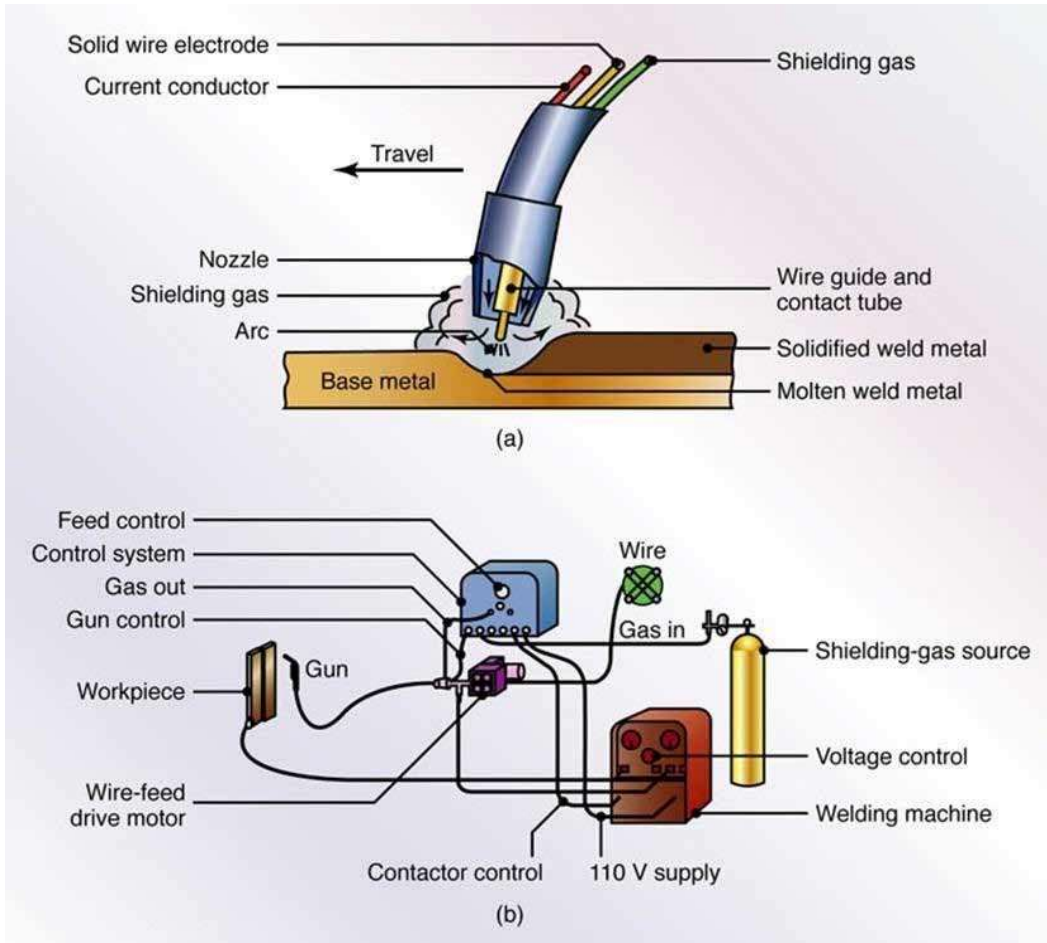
Schematics of GMAW; (a) GMAW welding Process (b) GMAW welding hardware block diagram
